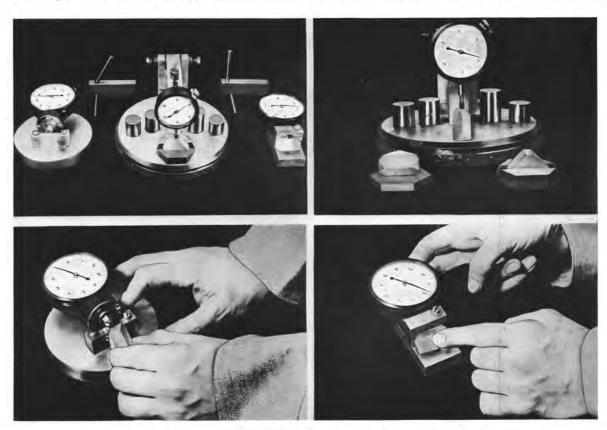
Dial gauges used to inspect the physical dimensions of prisms.
